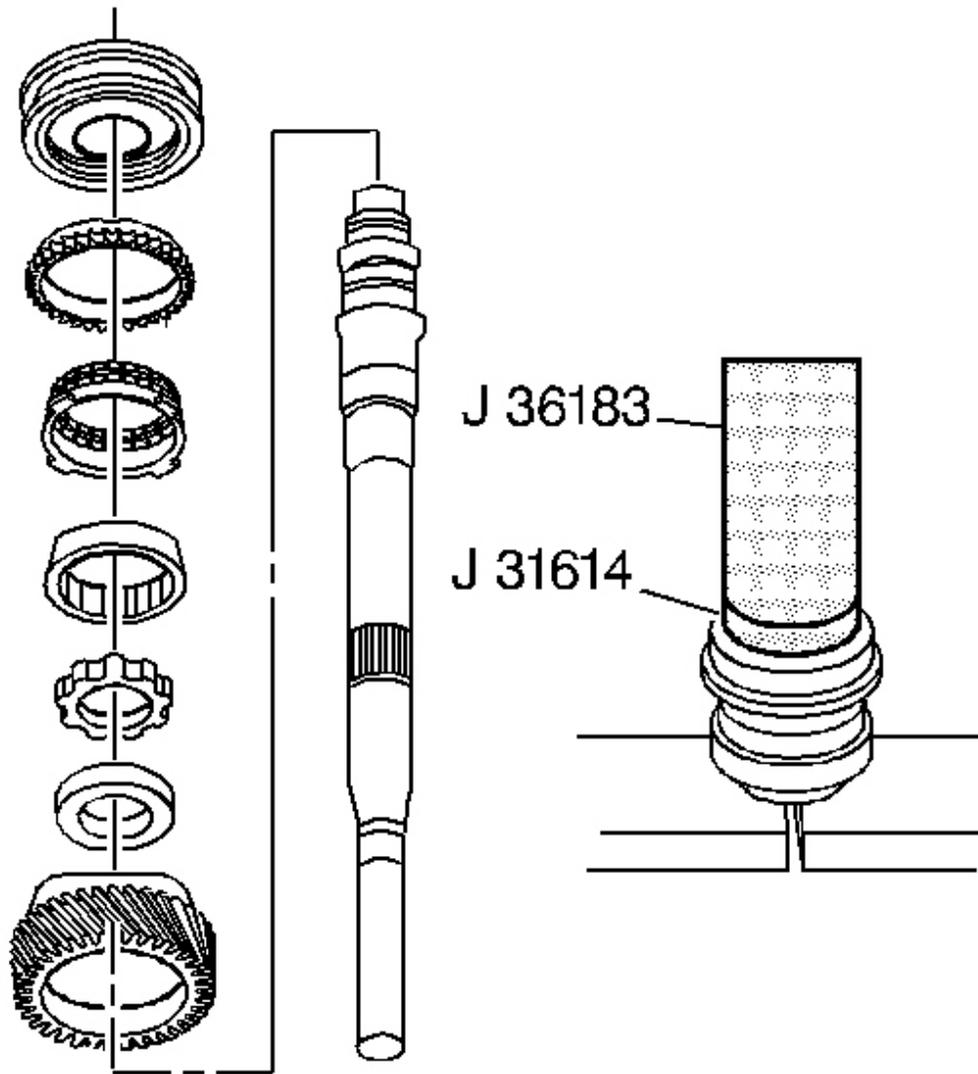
Installing 3rd/4th Synchronizer Assembly
